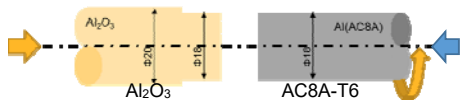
Dimension of test specimens and schematic of friction welding
